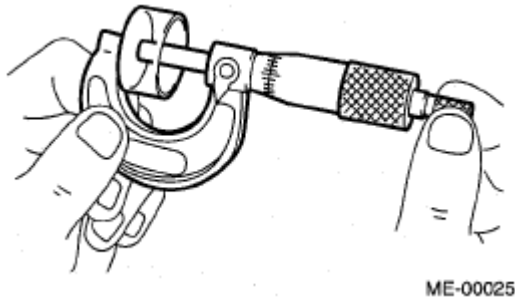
Measuring Thickness Of Valve Lifter Using Micrometer
